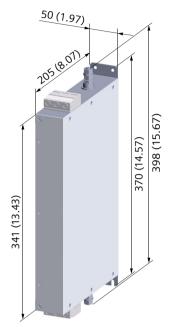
Dimension drawing of line filters for Smart Line Modules 16 kW and 24 kW, all dimensions in mm and (inch)
